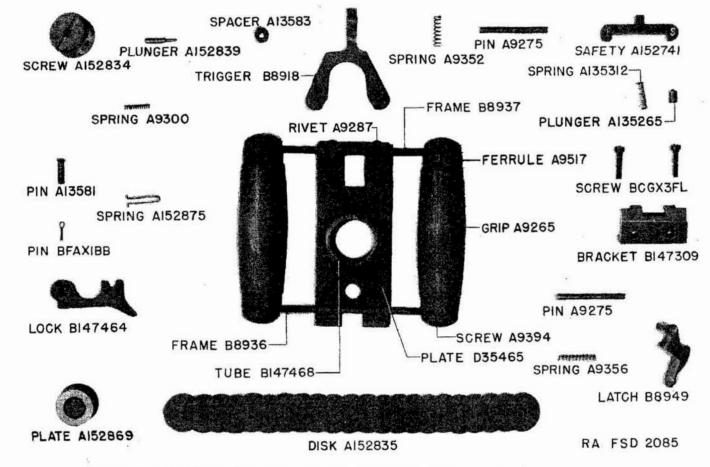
BROWNING MACHINE GUN, CAL. .50, M2, AIRCRAFT - FLEXIBLE - SPADE GRIP BACK PLATE - PARTS
